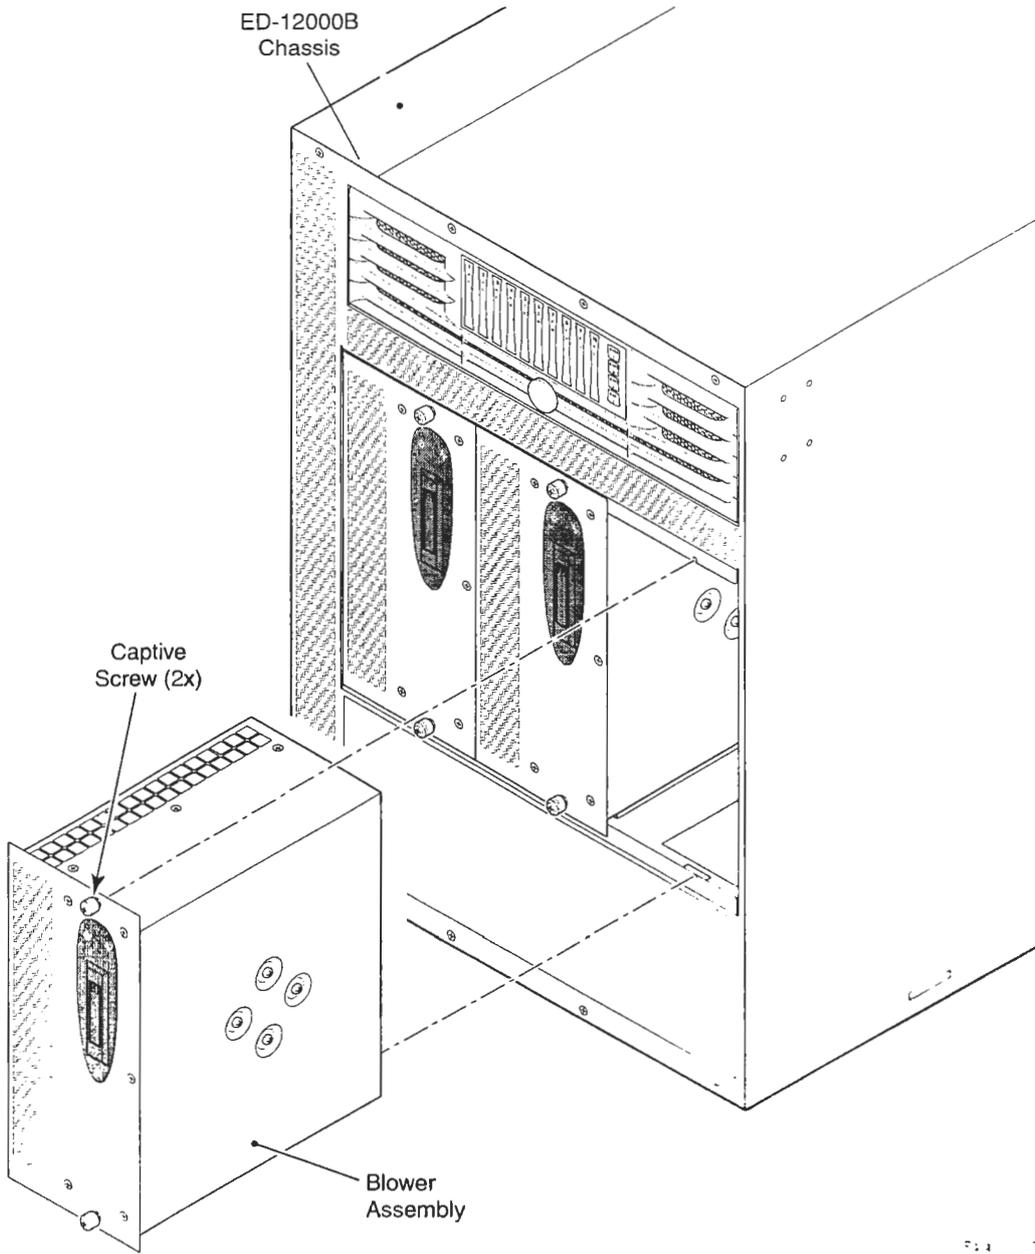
Blower Assembly Side of ED-12000B (shown with one blower assembly uninstalled)
